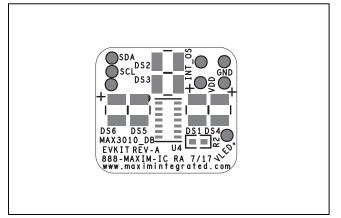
MAX30105 Daughter Board PCB Layout—Solder Side
